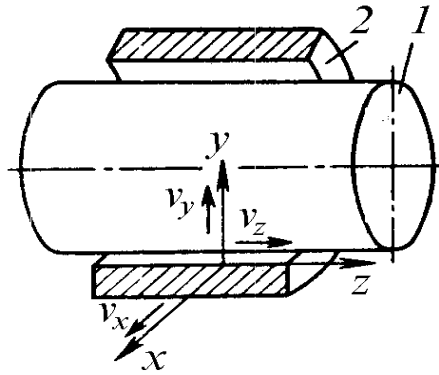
Elements of the Surfaces of the Shaft Journal and Bearing Separated by A Layer of Oil
